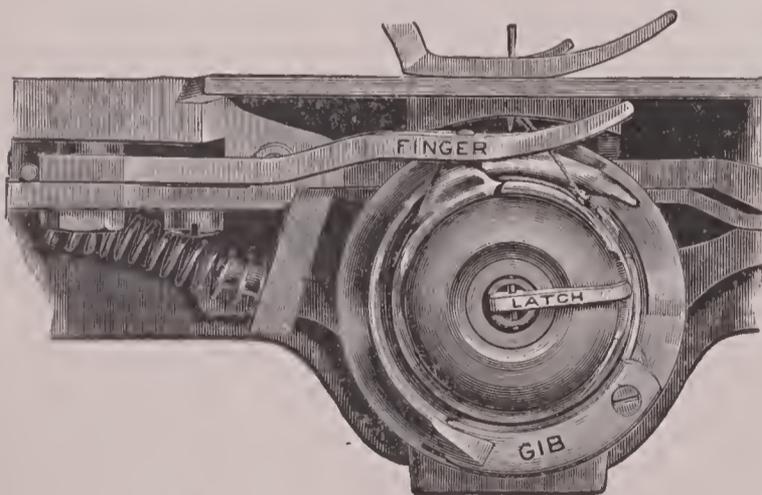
Wheeler & Wilson bobbin and bobbin case in the rotary hook.
